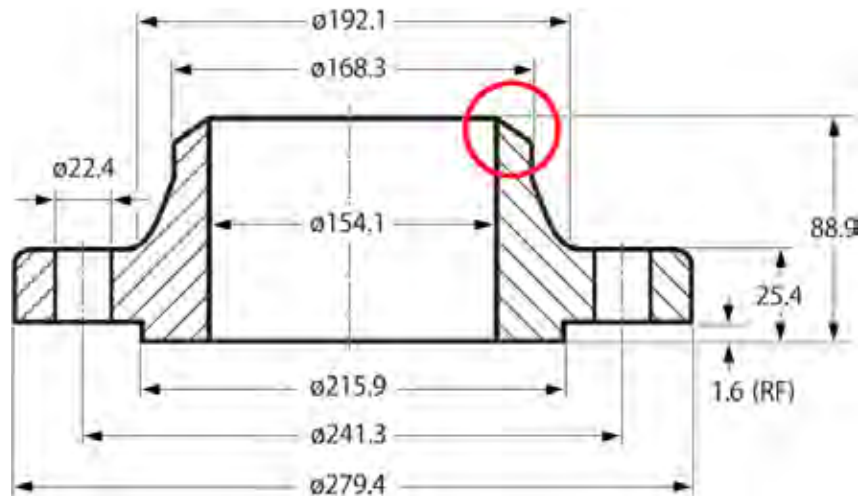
Weld neck flange NPS 6, class 150, schedule 40, ASME B16.5
